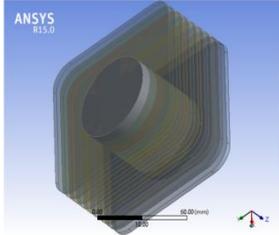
3D geometry of IC engine cylinder and fins without holes on fins
